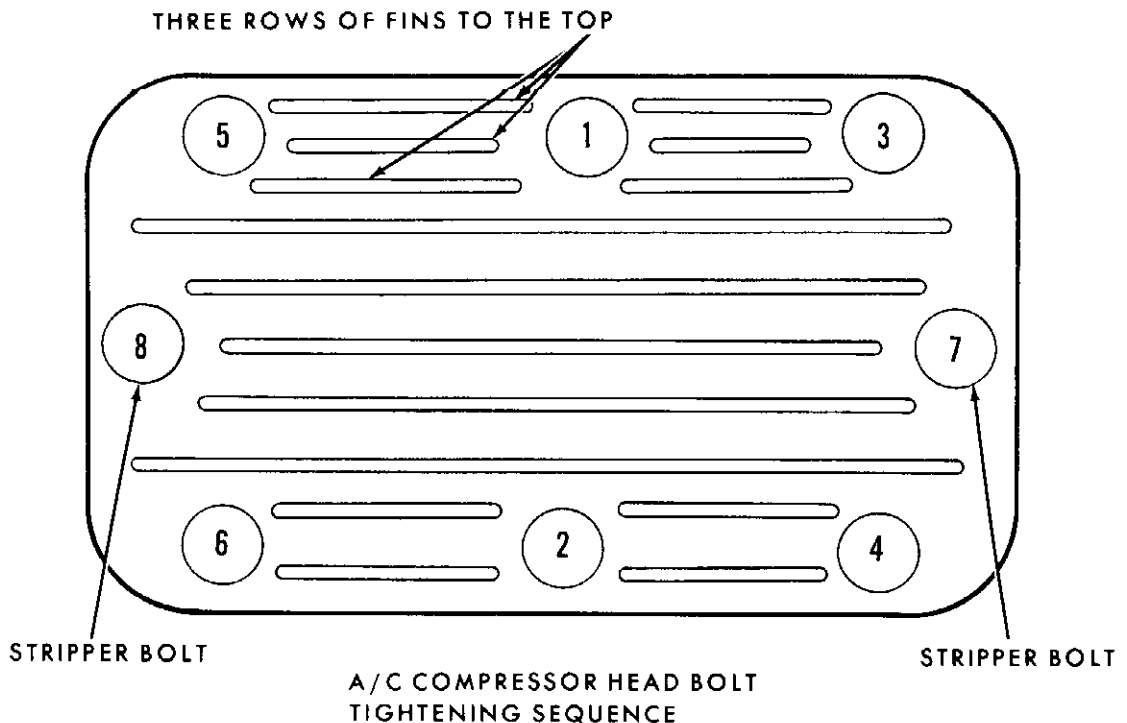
Compressor Head Tightening Sequence—1957—4 Cylinder—(61LM-8810)
